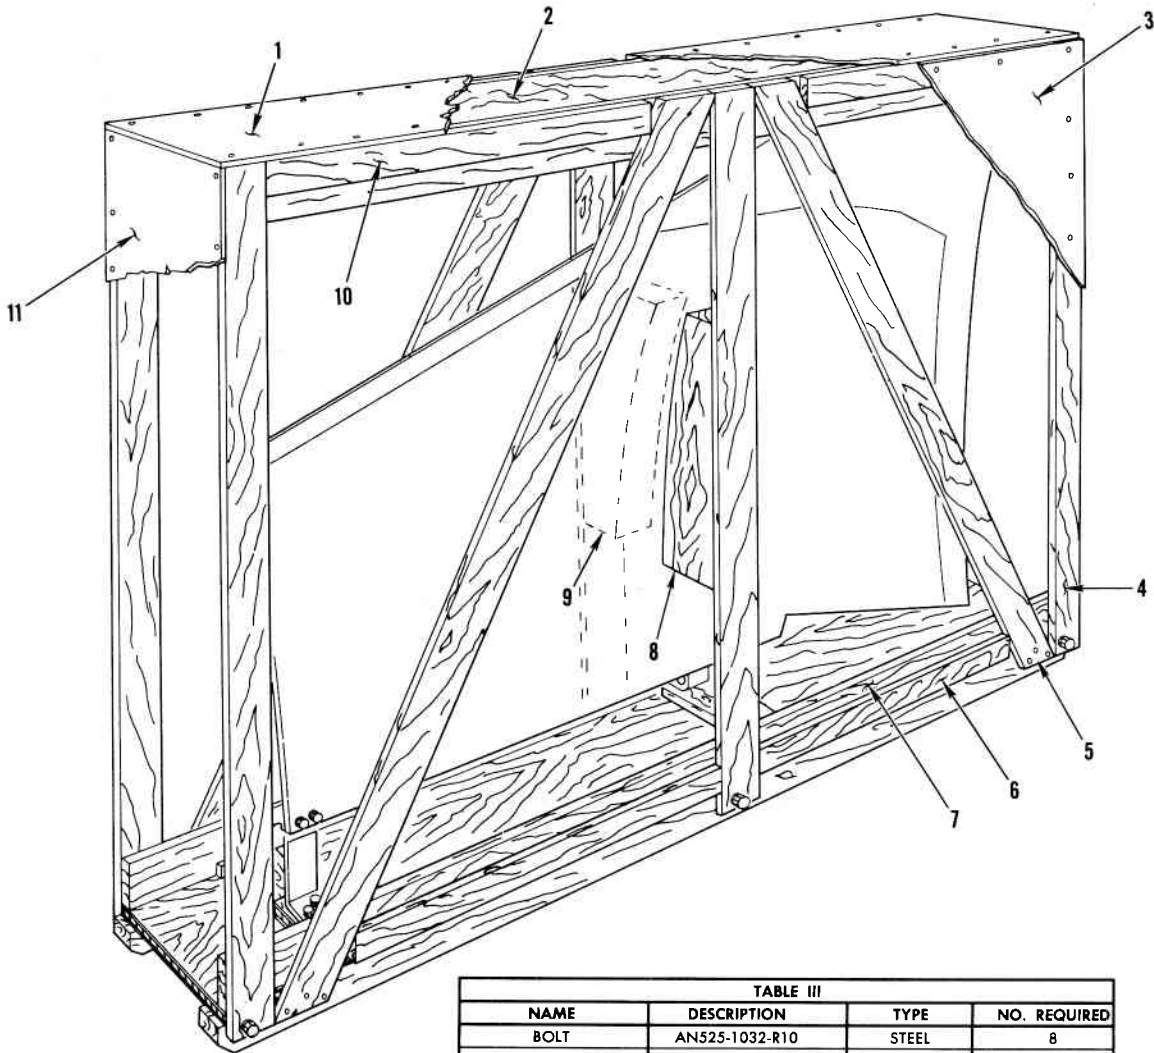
Packing and Crating — Wing Tip (Sheet 1 of 2)
